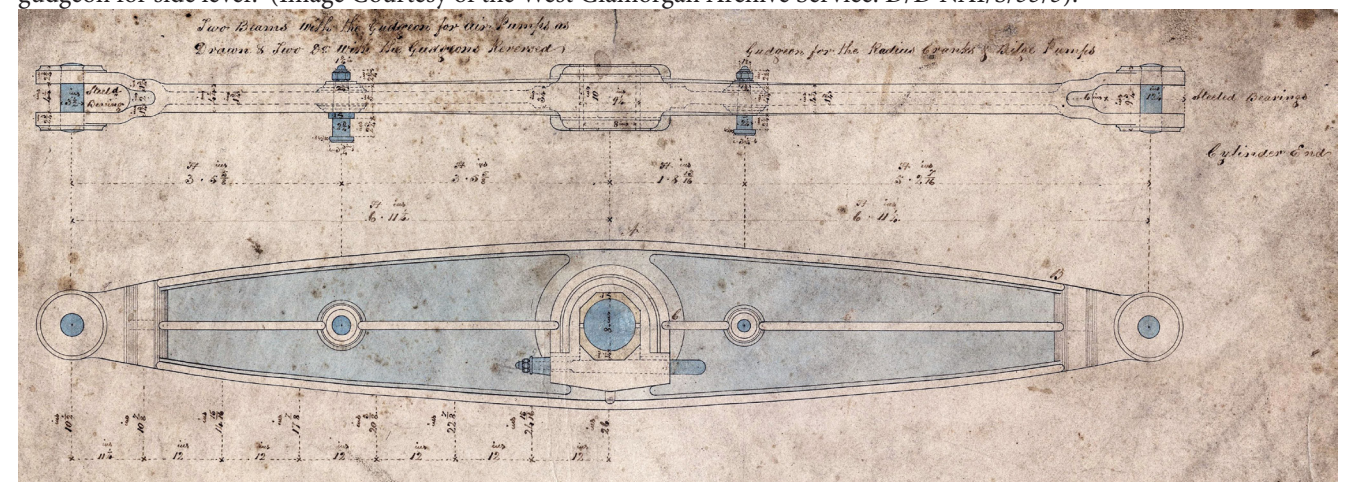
Detail of a Neath Abbey Ironworks engineering drawing depicting the plan and profile views of a side lever for a condensing side-lever engine built for *Mountaineer*. Note that the right end is the connection to the main cylinder, while the left end is the connection to the paddlewheel shaft. Two gudgeons are also indicated, one on the right to drive the radius crank and bilge pump, and one on the left to drive the air pump. (Image Courtesy of the West Glamorgan Archive Service: D/D NAI/S/35/5).
